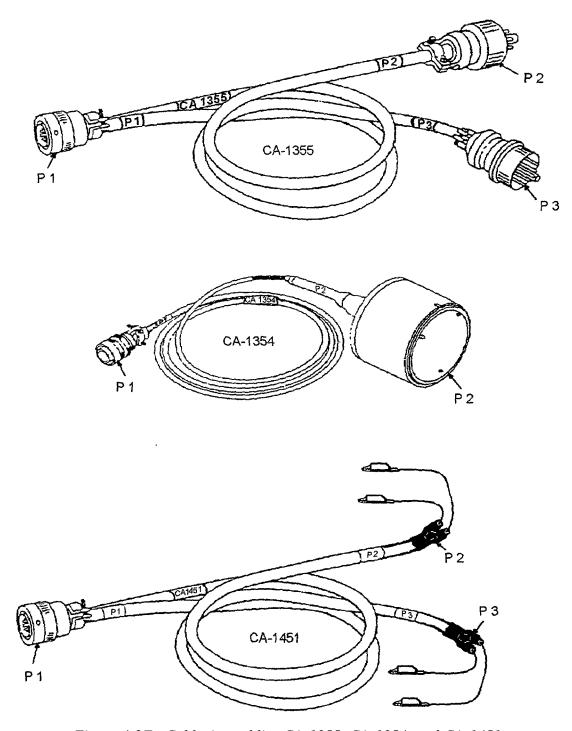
F. Cable Assemblies CA-1355, CA-1354, and CA-1451
